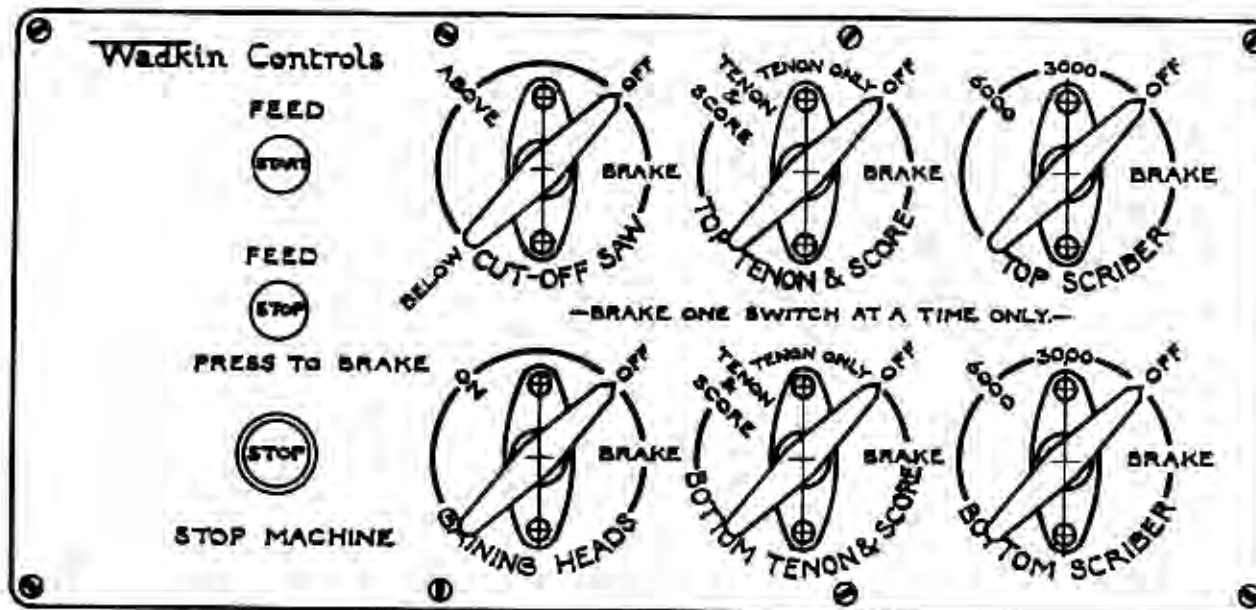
CONTROL DESK - FIXED HEADSTOCK.
